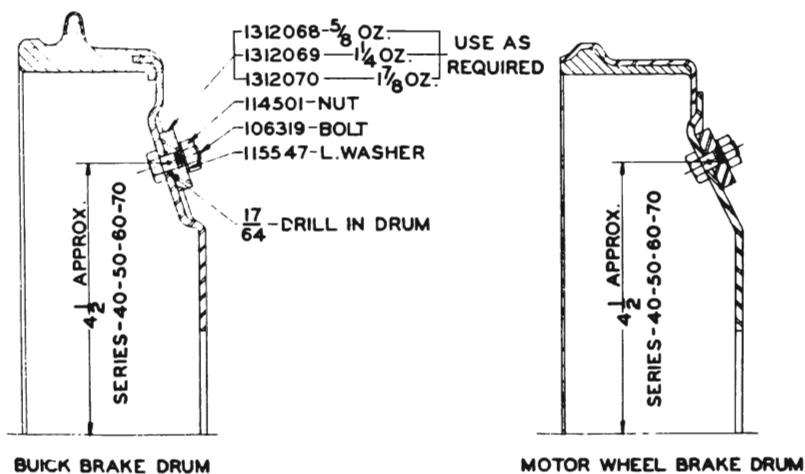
Brake Drum Balance Weights—Series 40-50-60-70
